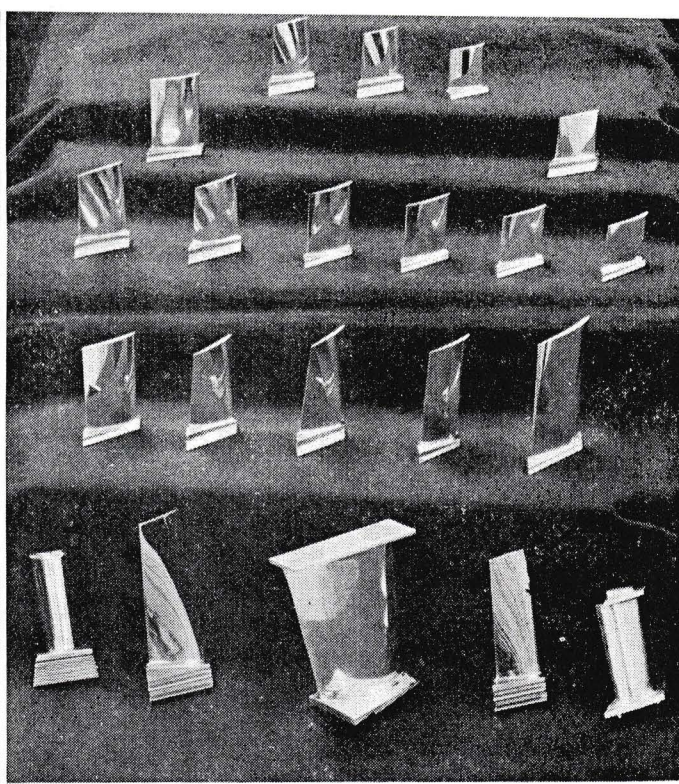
Variety of aluminum blades and vanes that go to make up a gas turbine compressor.
